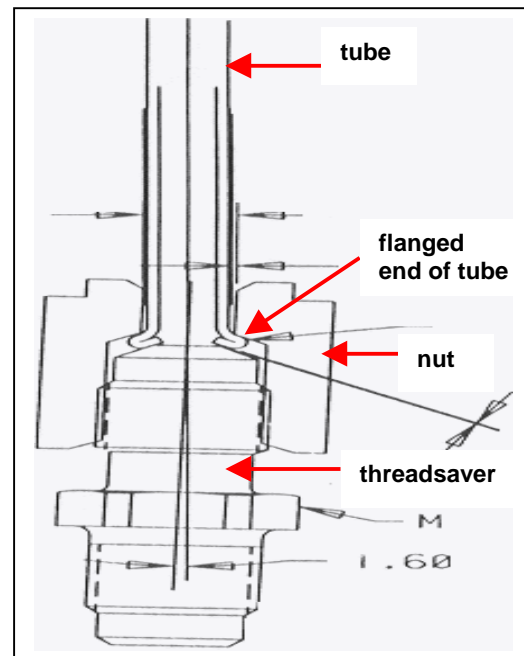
Diagram of assembly showing threadsaver, tube with flanged end, and nut.
